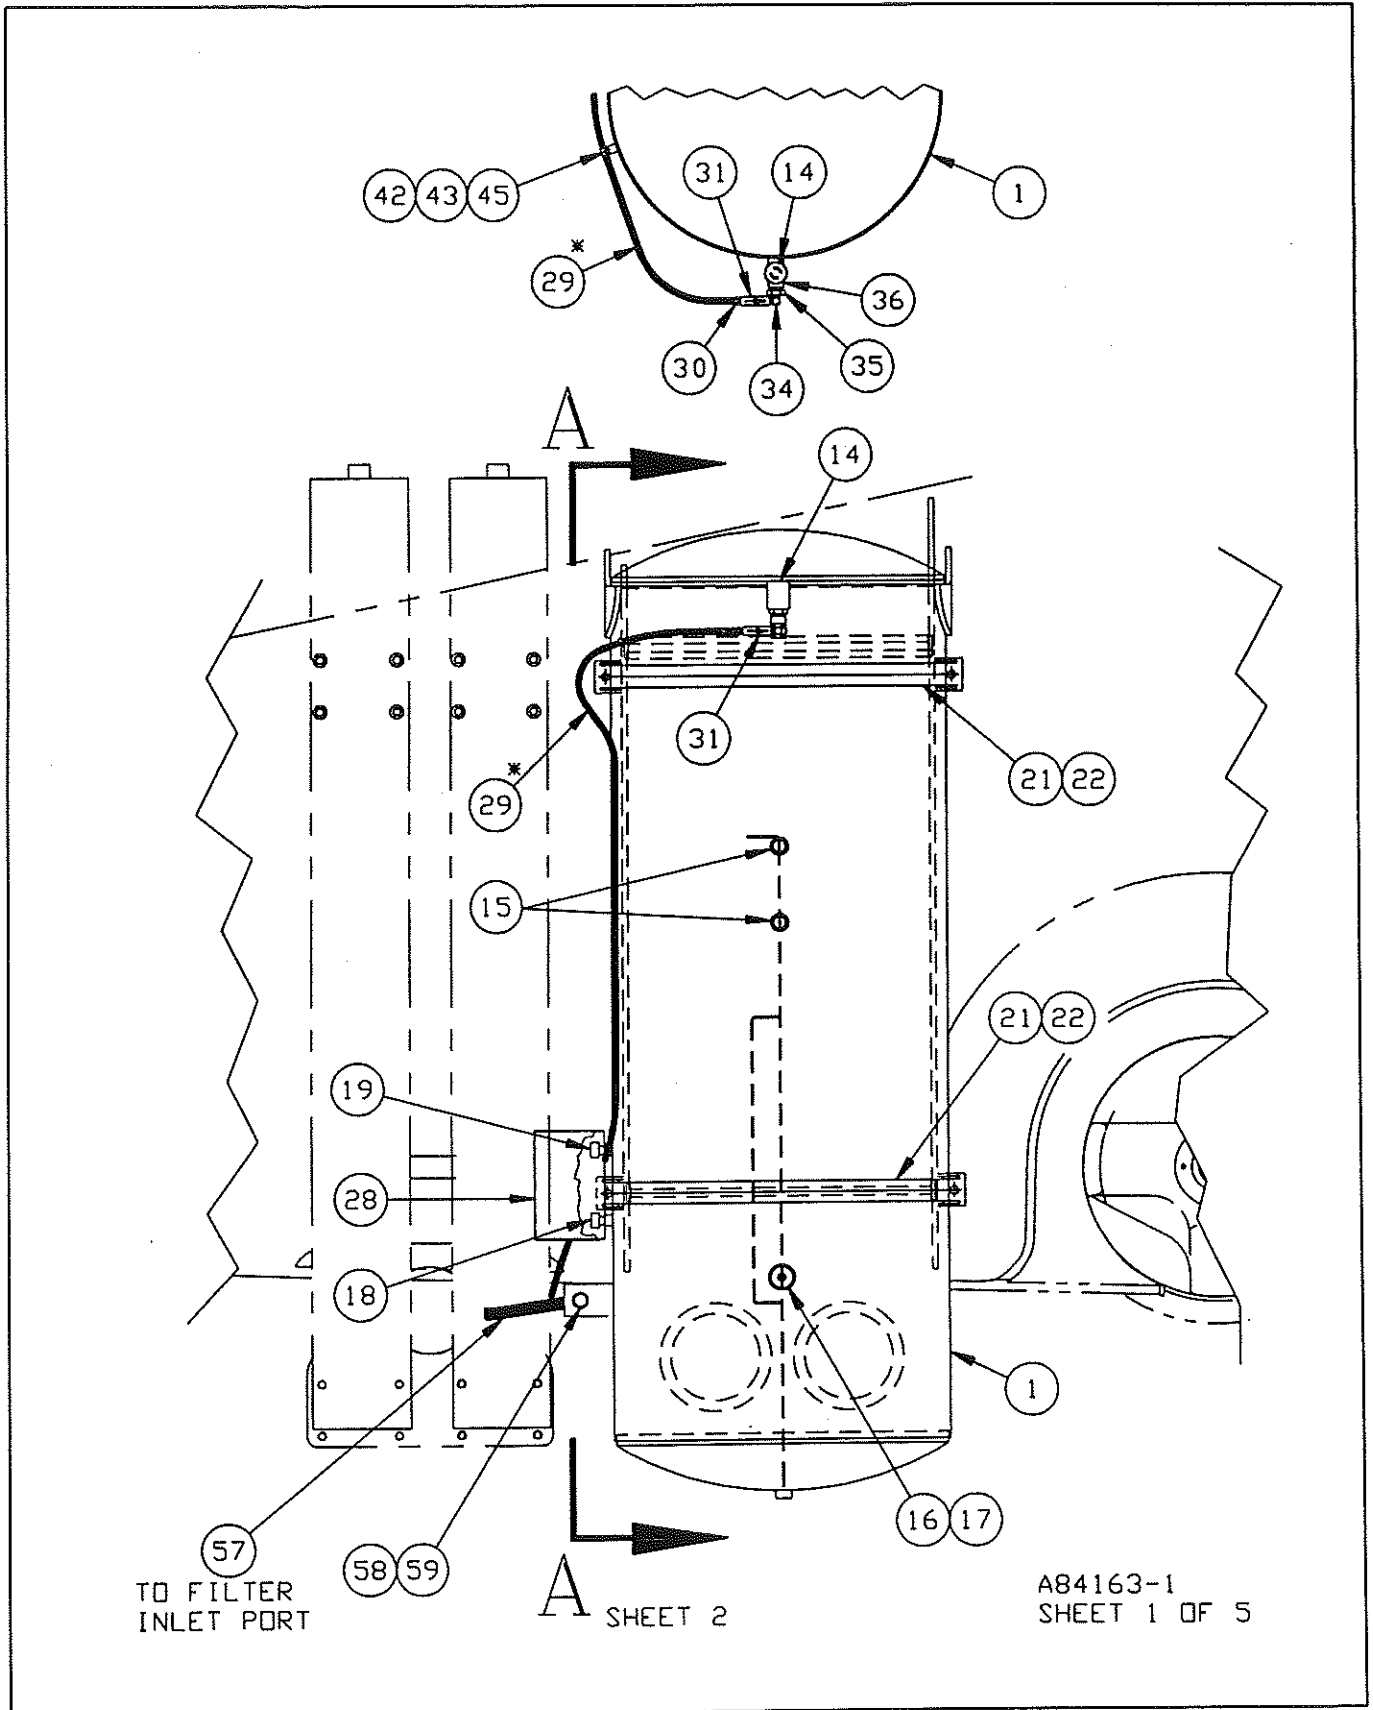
HYDRAULIC TANK ASSEMBLY
